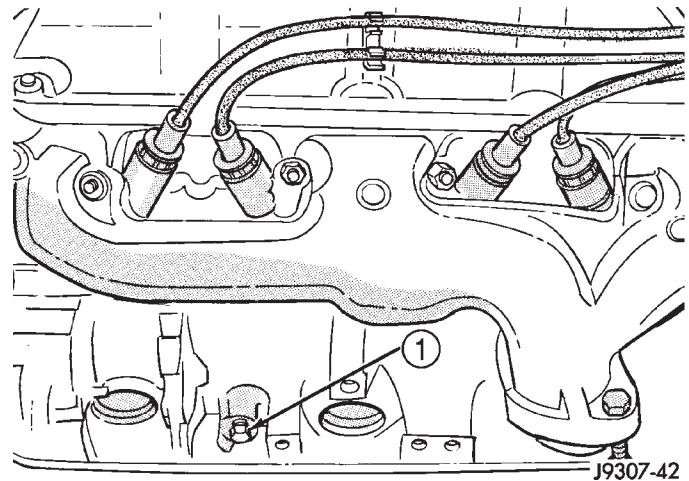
Cylinder Block Drain Plug - 5.9L Engines
